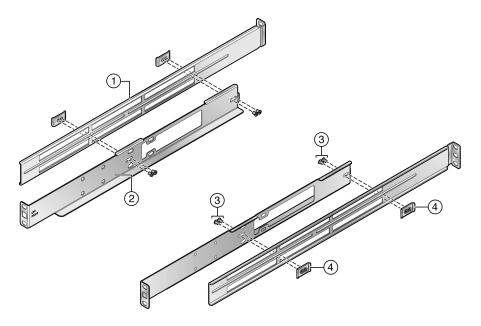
Removing the Extension from the Rack Mount Rail Assembly
